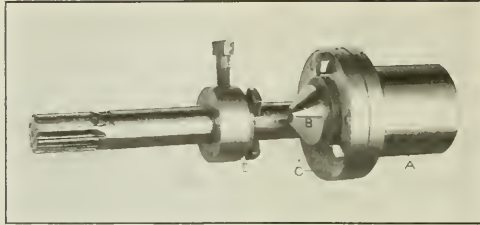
Non-floating Reamer-holder which is a product of the Marvin & Casler Co.
